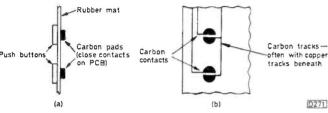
Mat contact assemblies. (a) Contact mat. (b) Section of PCB.
